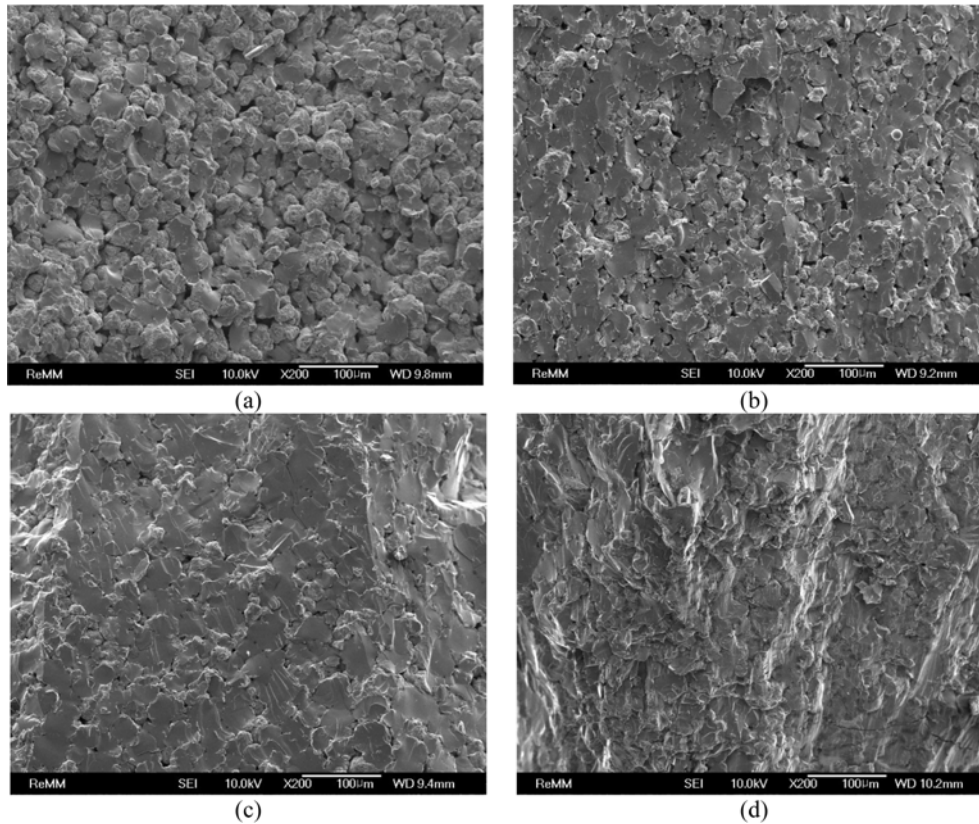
Fracture surface of post-compressive test of samples sintered at (a) 673 K, (b) 693 K, (c) 733 K and (d) 753 K.
